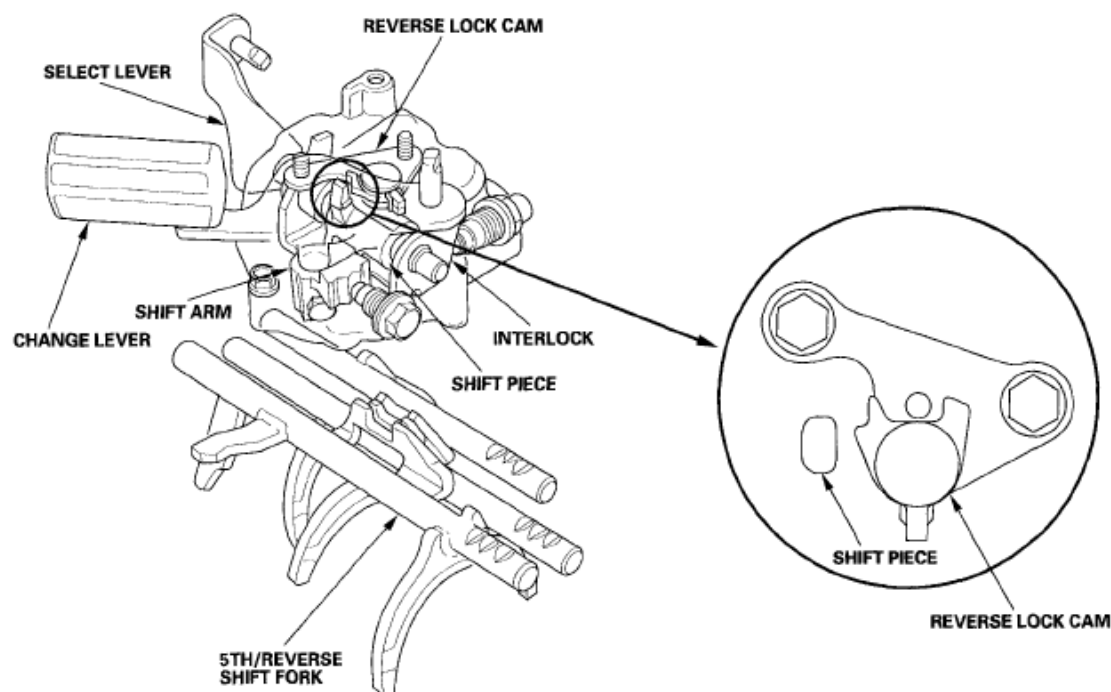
Identifying Reverse Lockout System Prevents Mis-Shifting From 5Th Gear To Reverse
